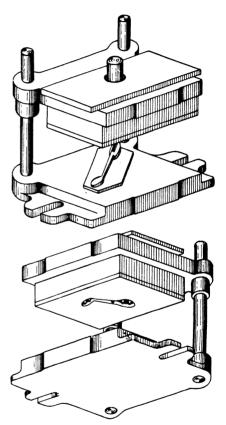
Overhead trim die, which is recommended when the flash of the die casting can be trimmed against the casting body. The recess in the locating plate can be machined or cast.
